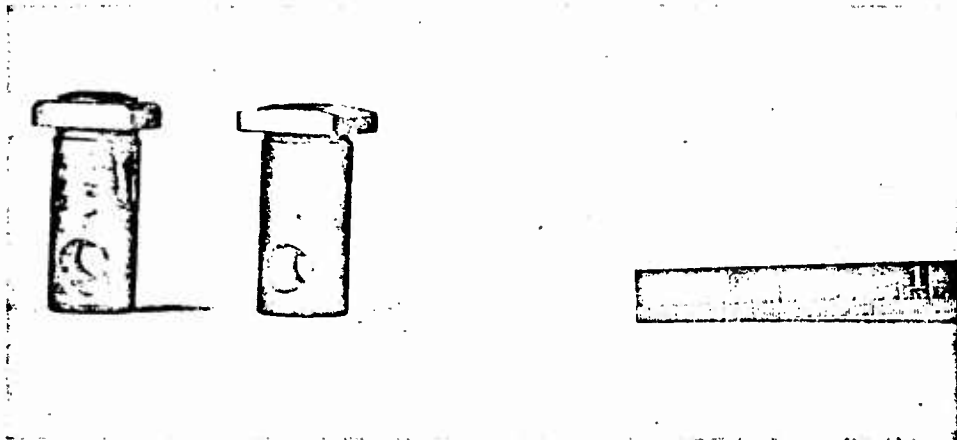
Two Modifications of Friction Cam Pins Showing Firing Pin Hole Differences.
